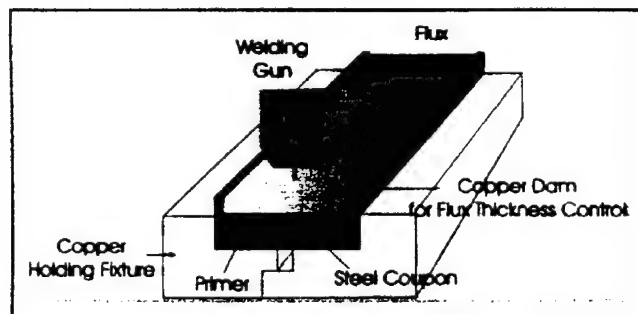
Schematic of Set-up Used for Welding Experiments.
